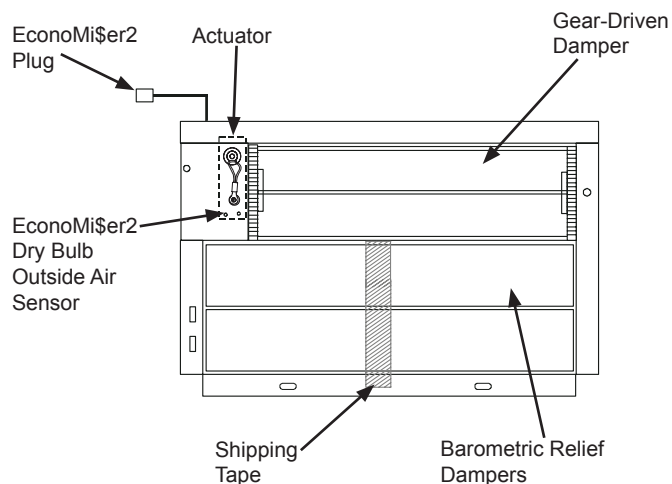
EconoMiSer2 Component Locations — (2 to 6 Ton Shown)
